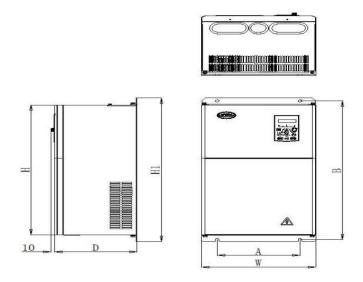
$15kW \sim 1000kW$  External Dimensions and Installation Dimensions Schematic
